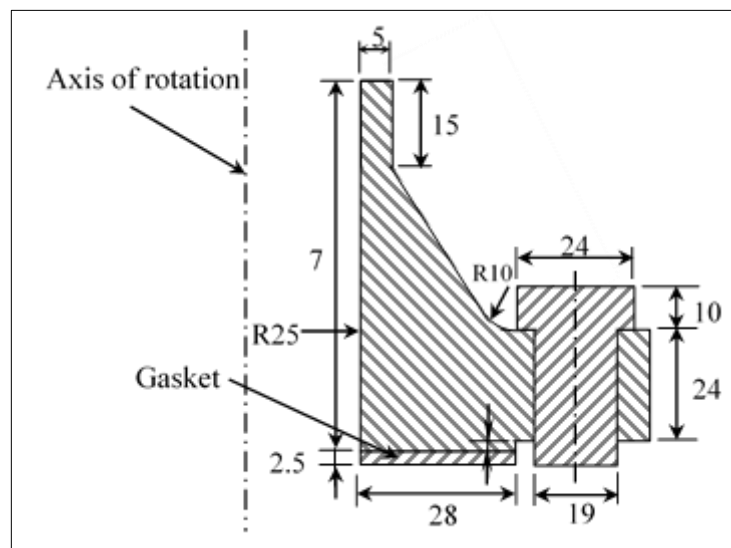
Bolted flange joint (All dimensions in mm)
